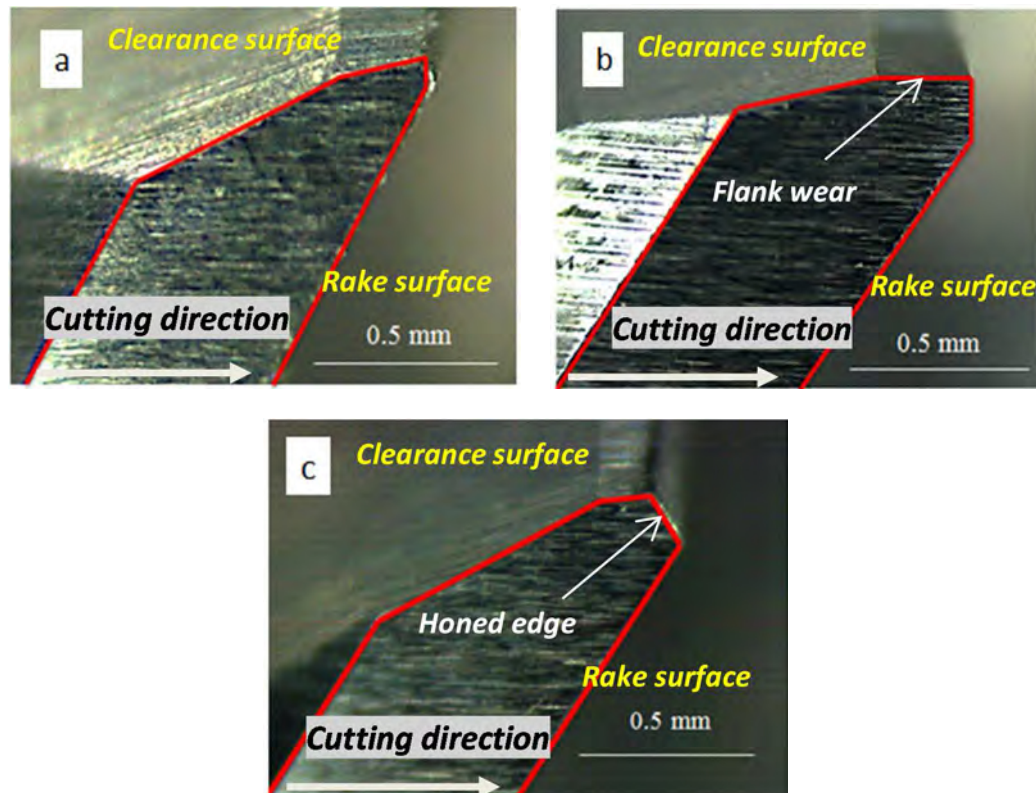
Edge geometry of the drills: (A) fresh tool; (B) flank wear; and (C) honed edge.
